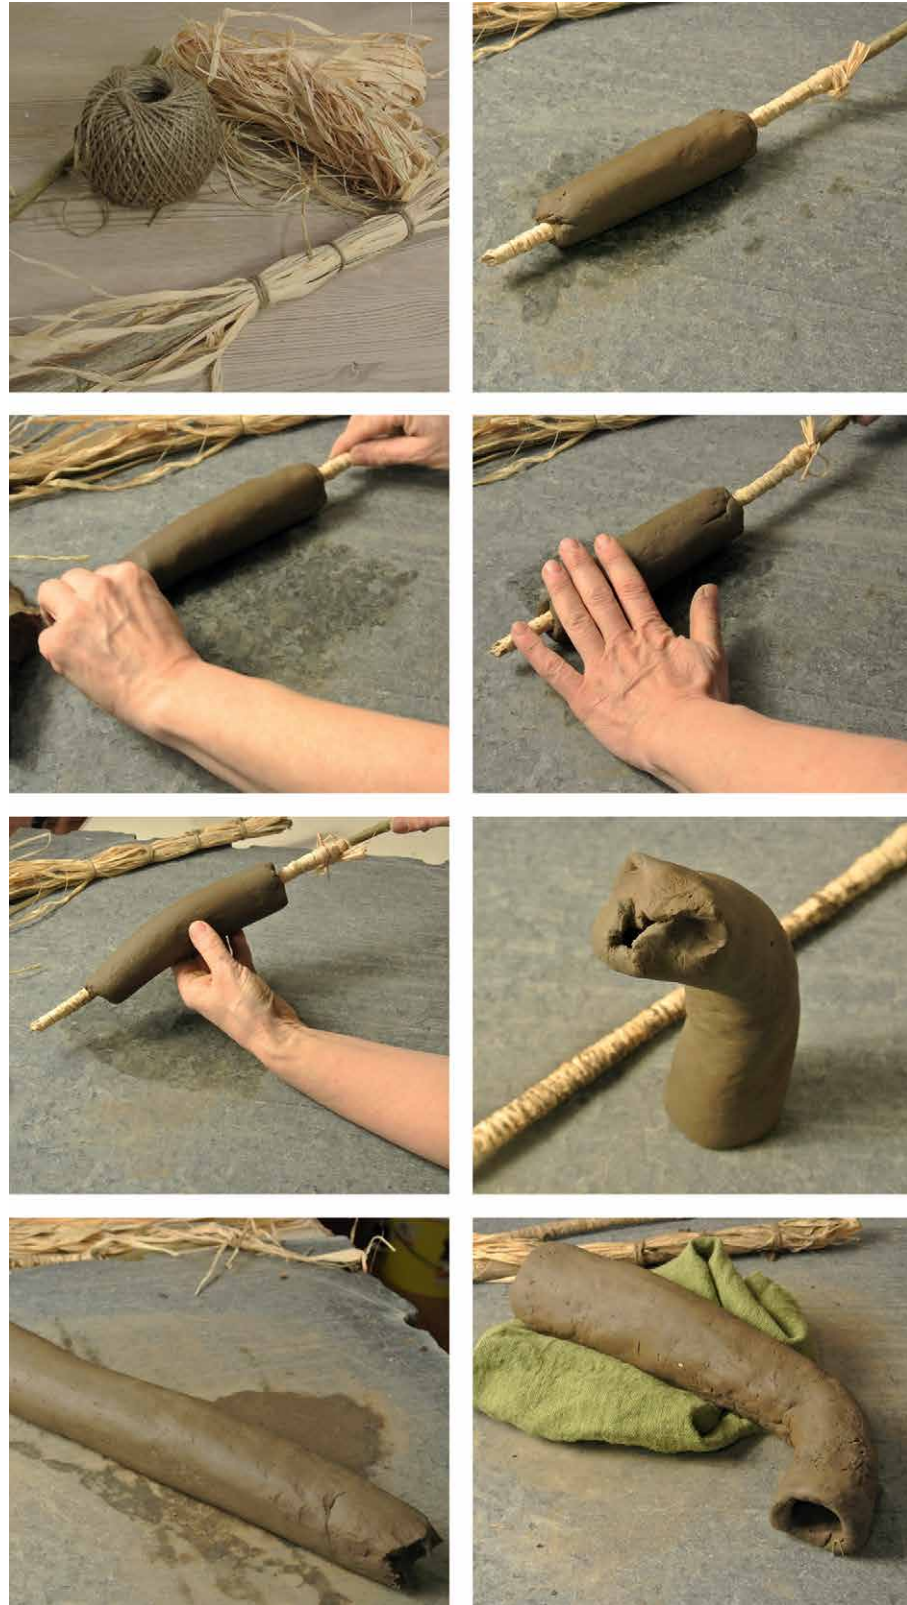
Manufacturing technique for making tubes. This rolling technique is used to form the basic element of a reconstructed tuyère. It is a very convenient and sure technique for making a hollow tube without seams or joints (photo © Paul Eklöv Pettersson).
